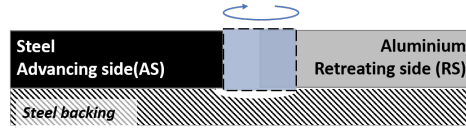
Schematic illustration of the pin and its location in the weld groove of the third produced Al-Fe HYB butt weld.
